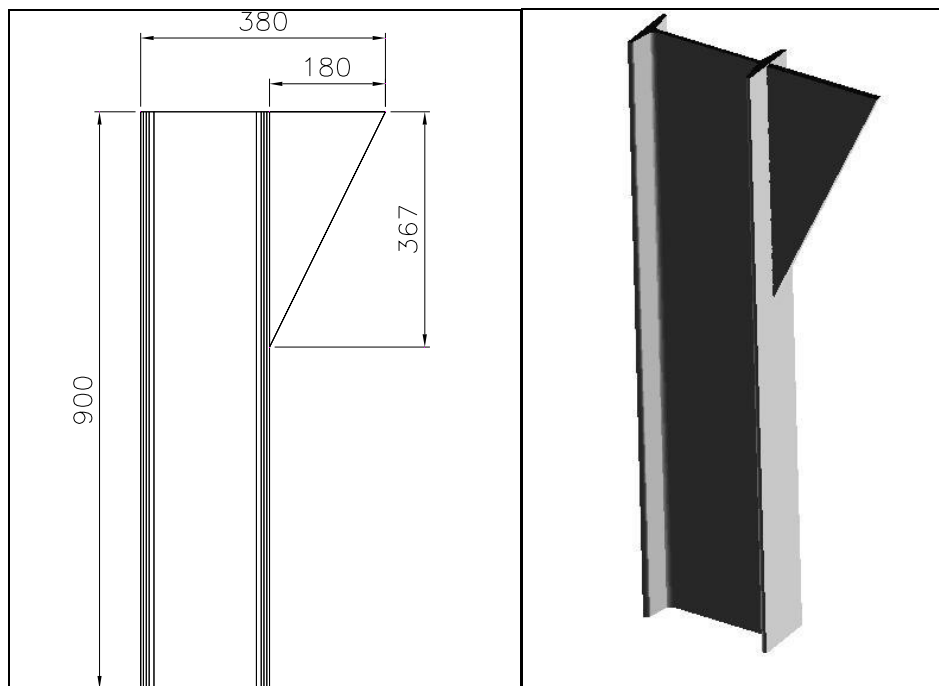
Dimensions and 3D Model of the Sting and Flange
